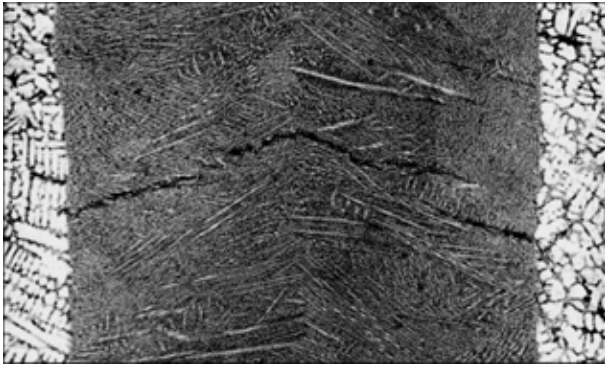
Transverse crack in weld metal on alloy JS-26 ($\times 30$)
